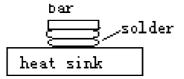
Solder with Au-sandwiched layer when the solder melts.
